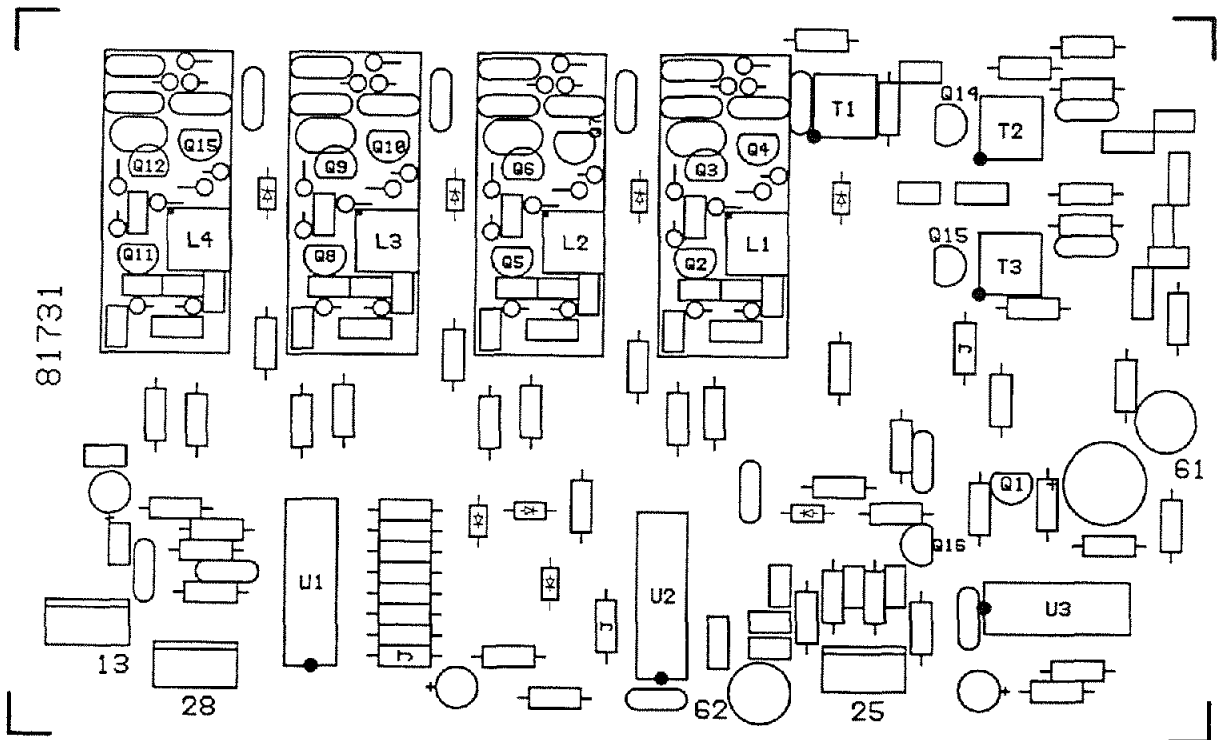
81731 1ST LO BOARD COMPONENT LAYOUT
